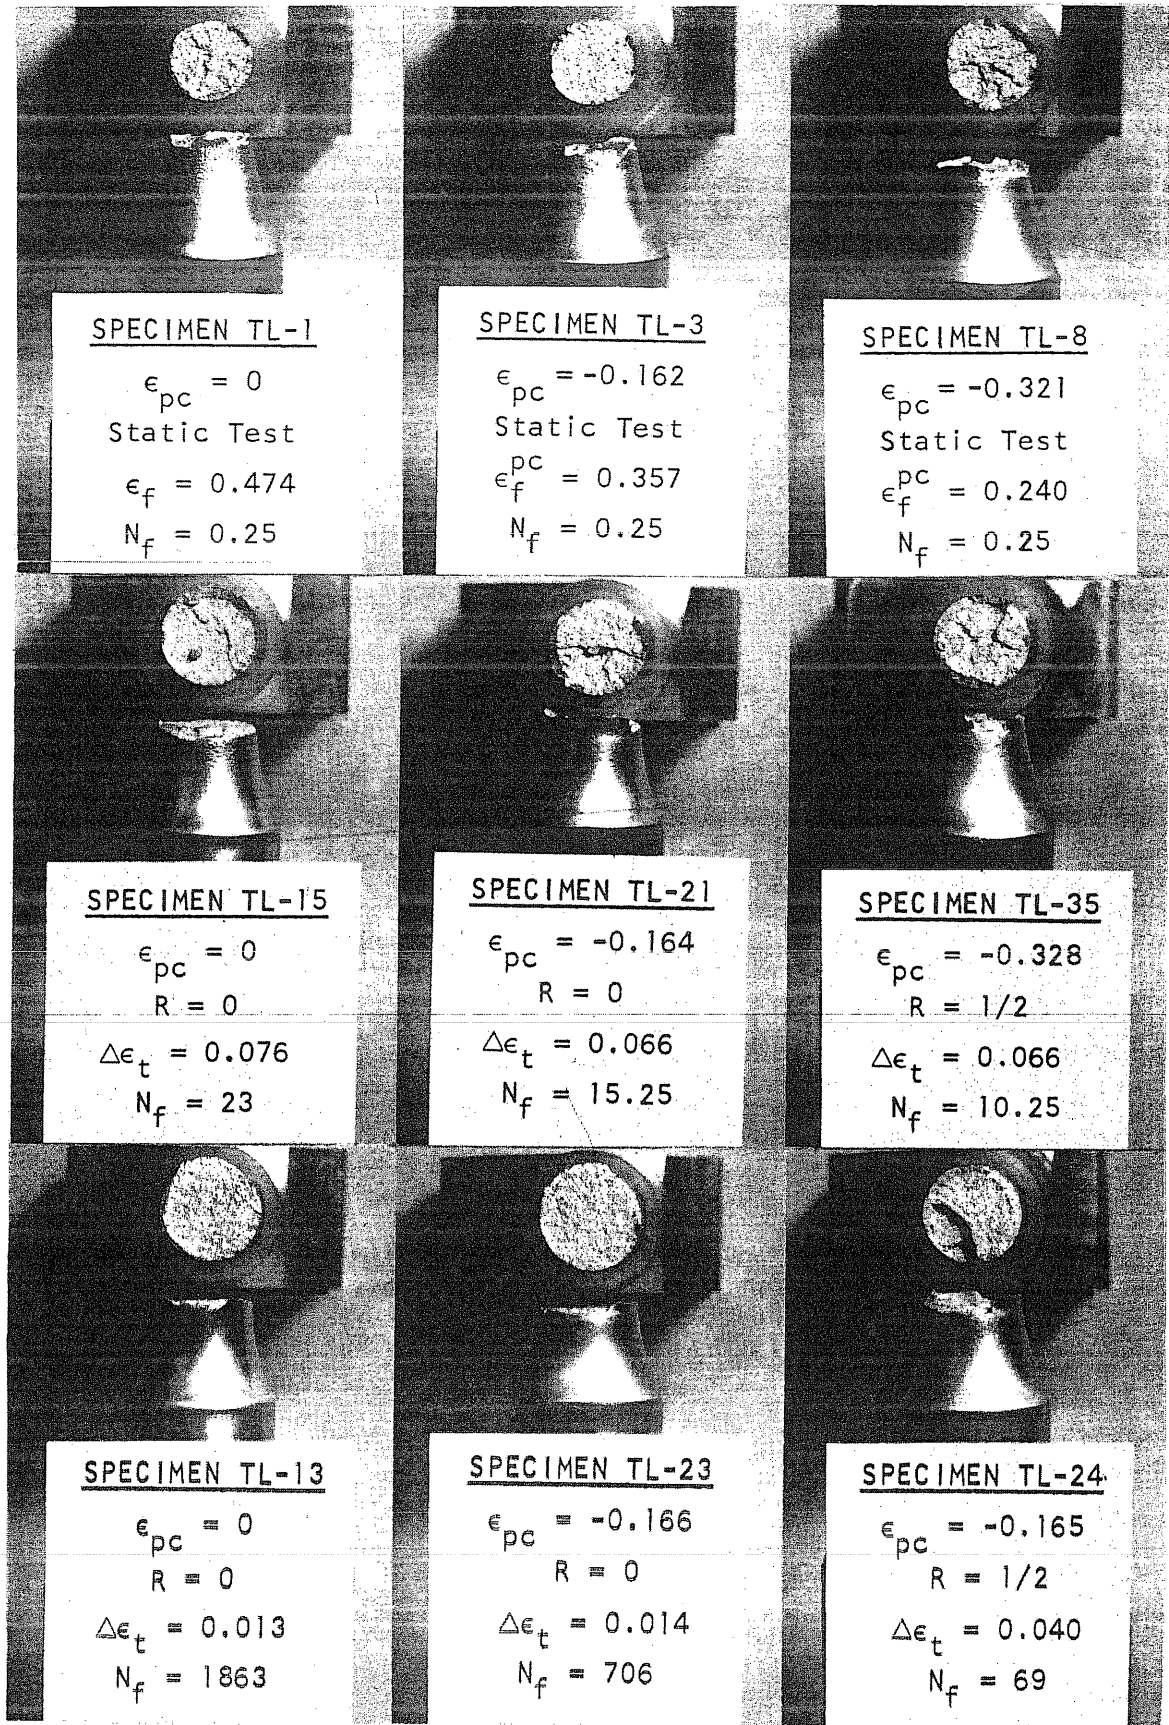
FRACTURE APPEARANCE OF TYPICAL STATIC AND FATIGUE TEST SPECIMENS
